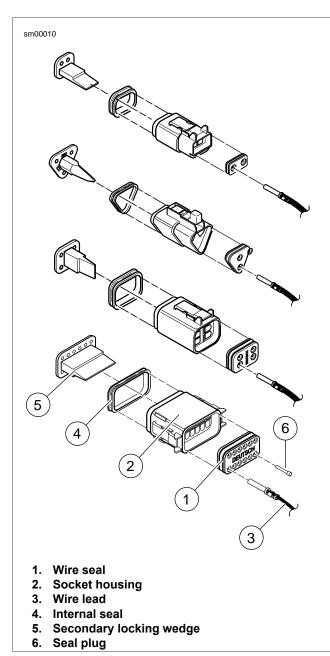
Deutsch DT Sealed Connector: 2, 3, 4 and 12-Place Socket Housings
